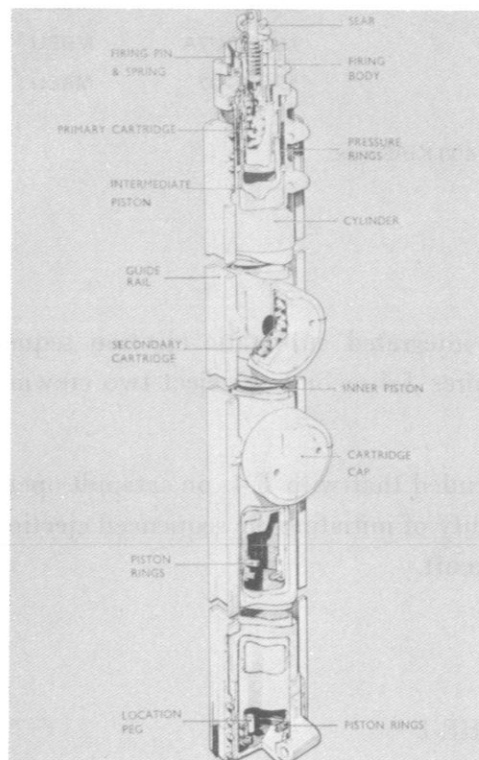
The 80 feet/second ejection gun and guide rail assembly.
